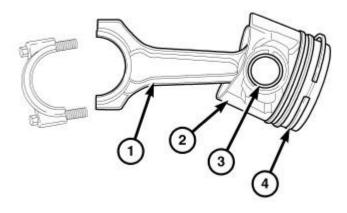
Piston & Connecting Rod Assembly Courtesy of CHRYSLER LLC
